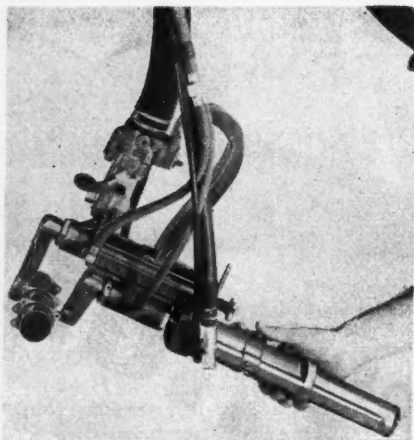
The new Progressive low-pressure welding gun for light gauge alloys is available complete with transformer, controls, etc., as to portable unit.
